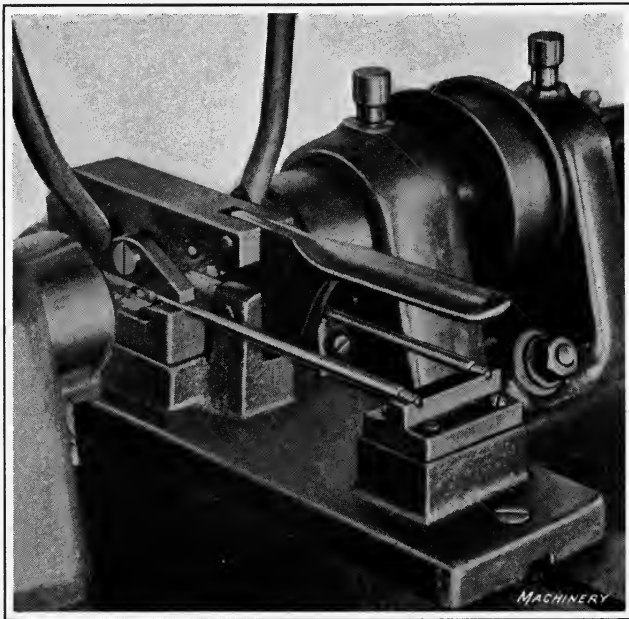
Machine provided with Fixture used in Spline Milling in which the Work is Readily Accessible
